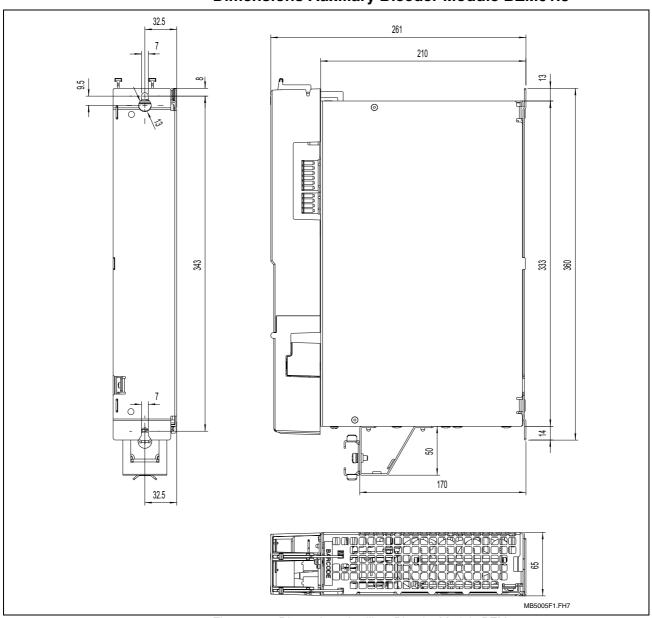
Dimensions Auxiliary Bleeder Module BZM01.3
